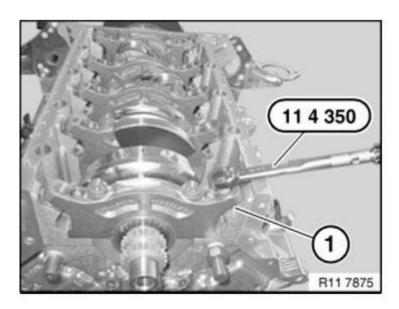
Securing Threaded Support Sleeves Using Special Tool 11 4 350 Courtesy of BMW OF NORTH AMERICA, INC.
